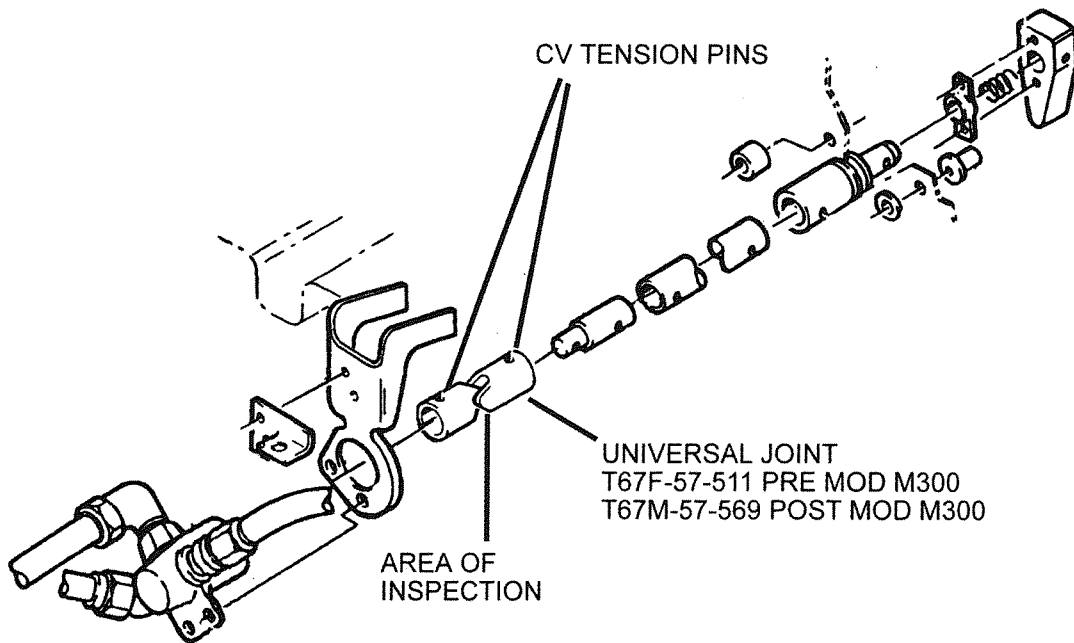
FUEL SELECTOR VALVE SHAFT DETAIL (T67M260, T67M260-T3A)
